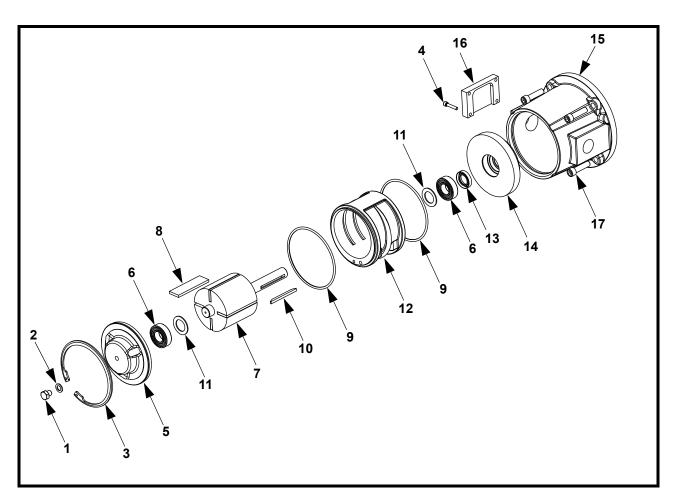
6A Air Motor Assembly, P/N 27874 (sheet 1 of 2)
